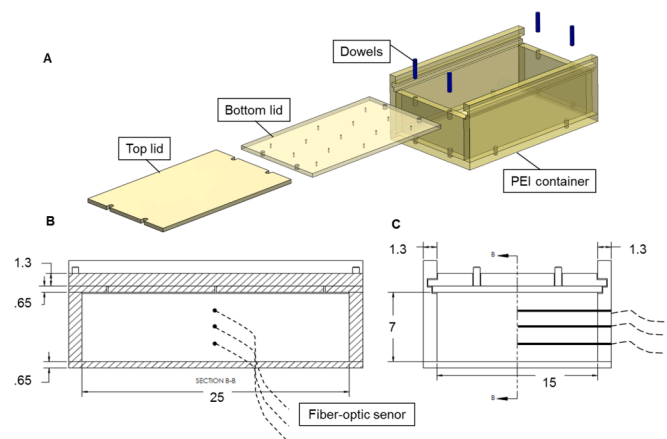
(A) 3D dimension of RF heating container, (B) lateral view, (C) cross-section view of the container with fiber-optic sensors in three layers. Dimensions in cm.
